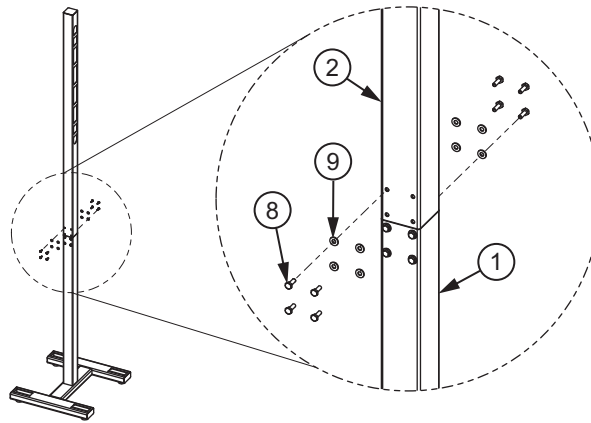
Upright Tube Attachment (Dual Arm Stand Displayed)
